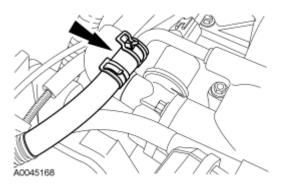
Vacuum Hose Courtesy of FORD MOTOR CO.
